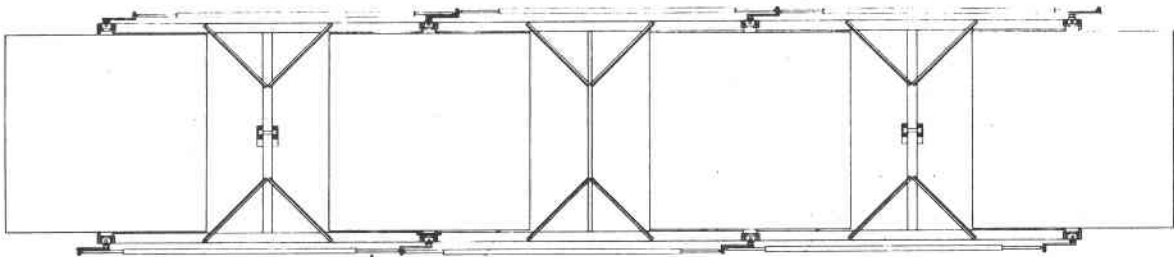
Engineering Model Heliostat Assembly and Alignment
